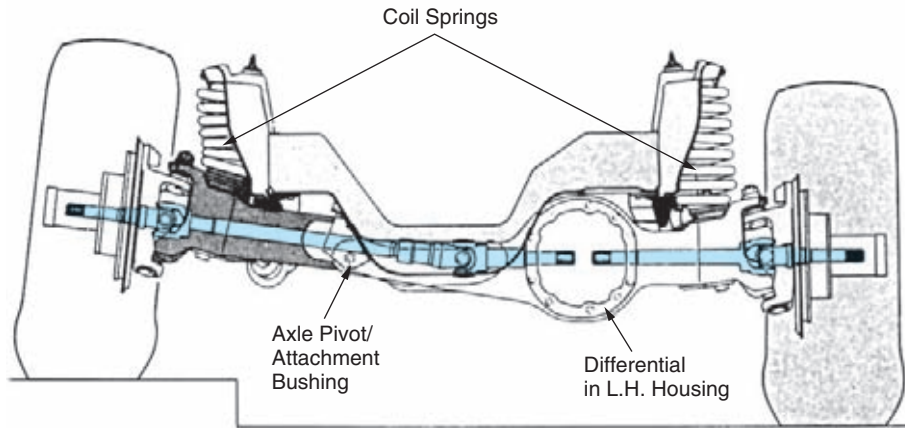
A twin-traction drive axle allows independent front suspension. (Courtesy of Ford Motor Company)
